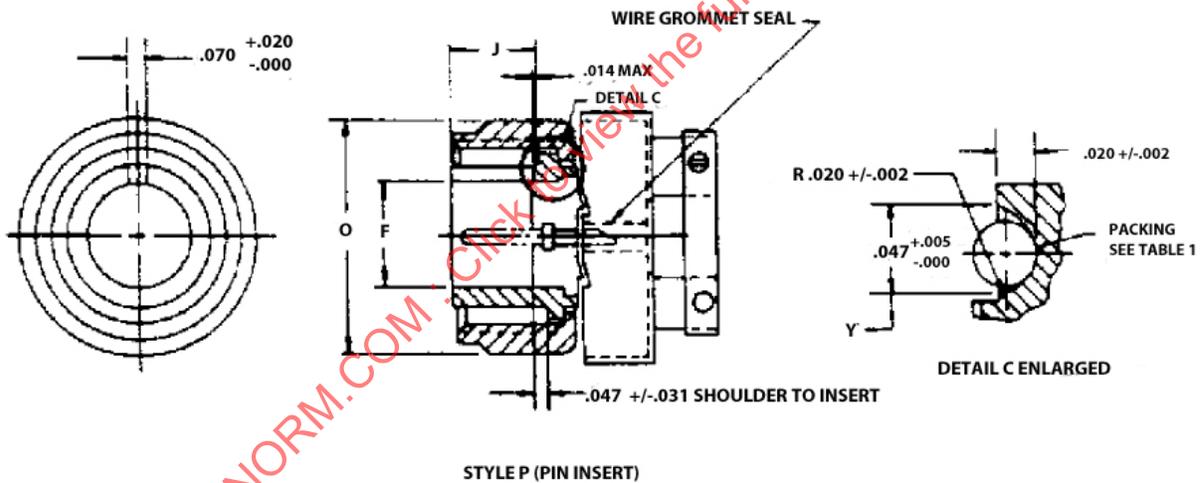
A – CONNECTOR CONFIGURATION AND DIMENSIONS
